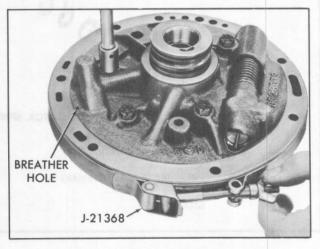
Installing By Pass Valve Seat Fig. 7-60 Aligning Pump Cover and Body
